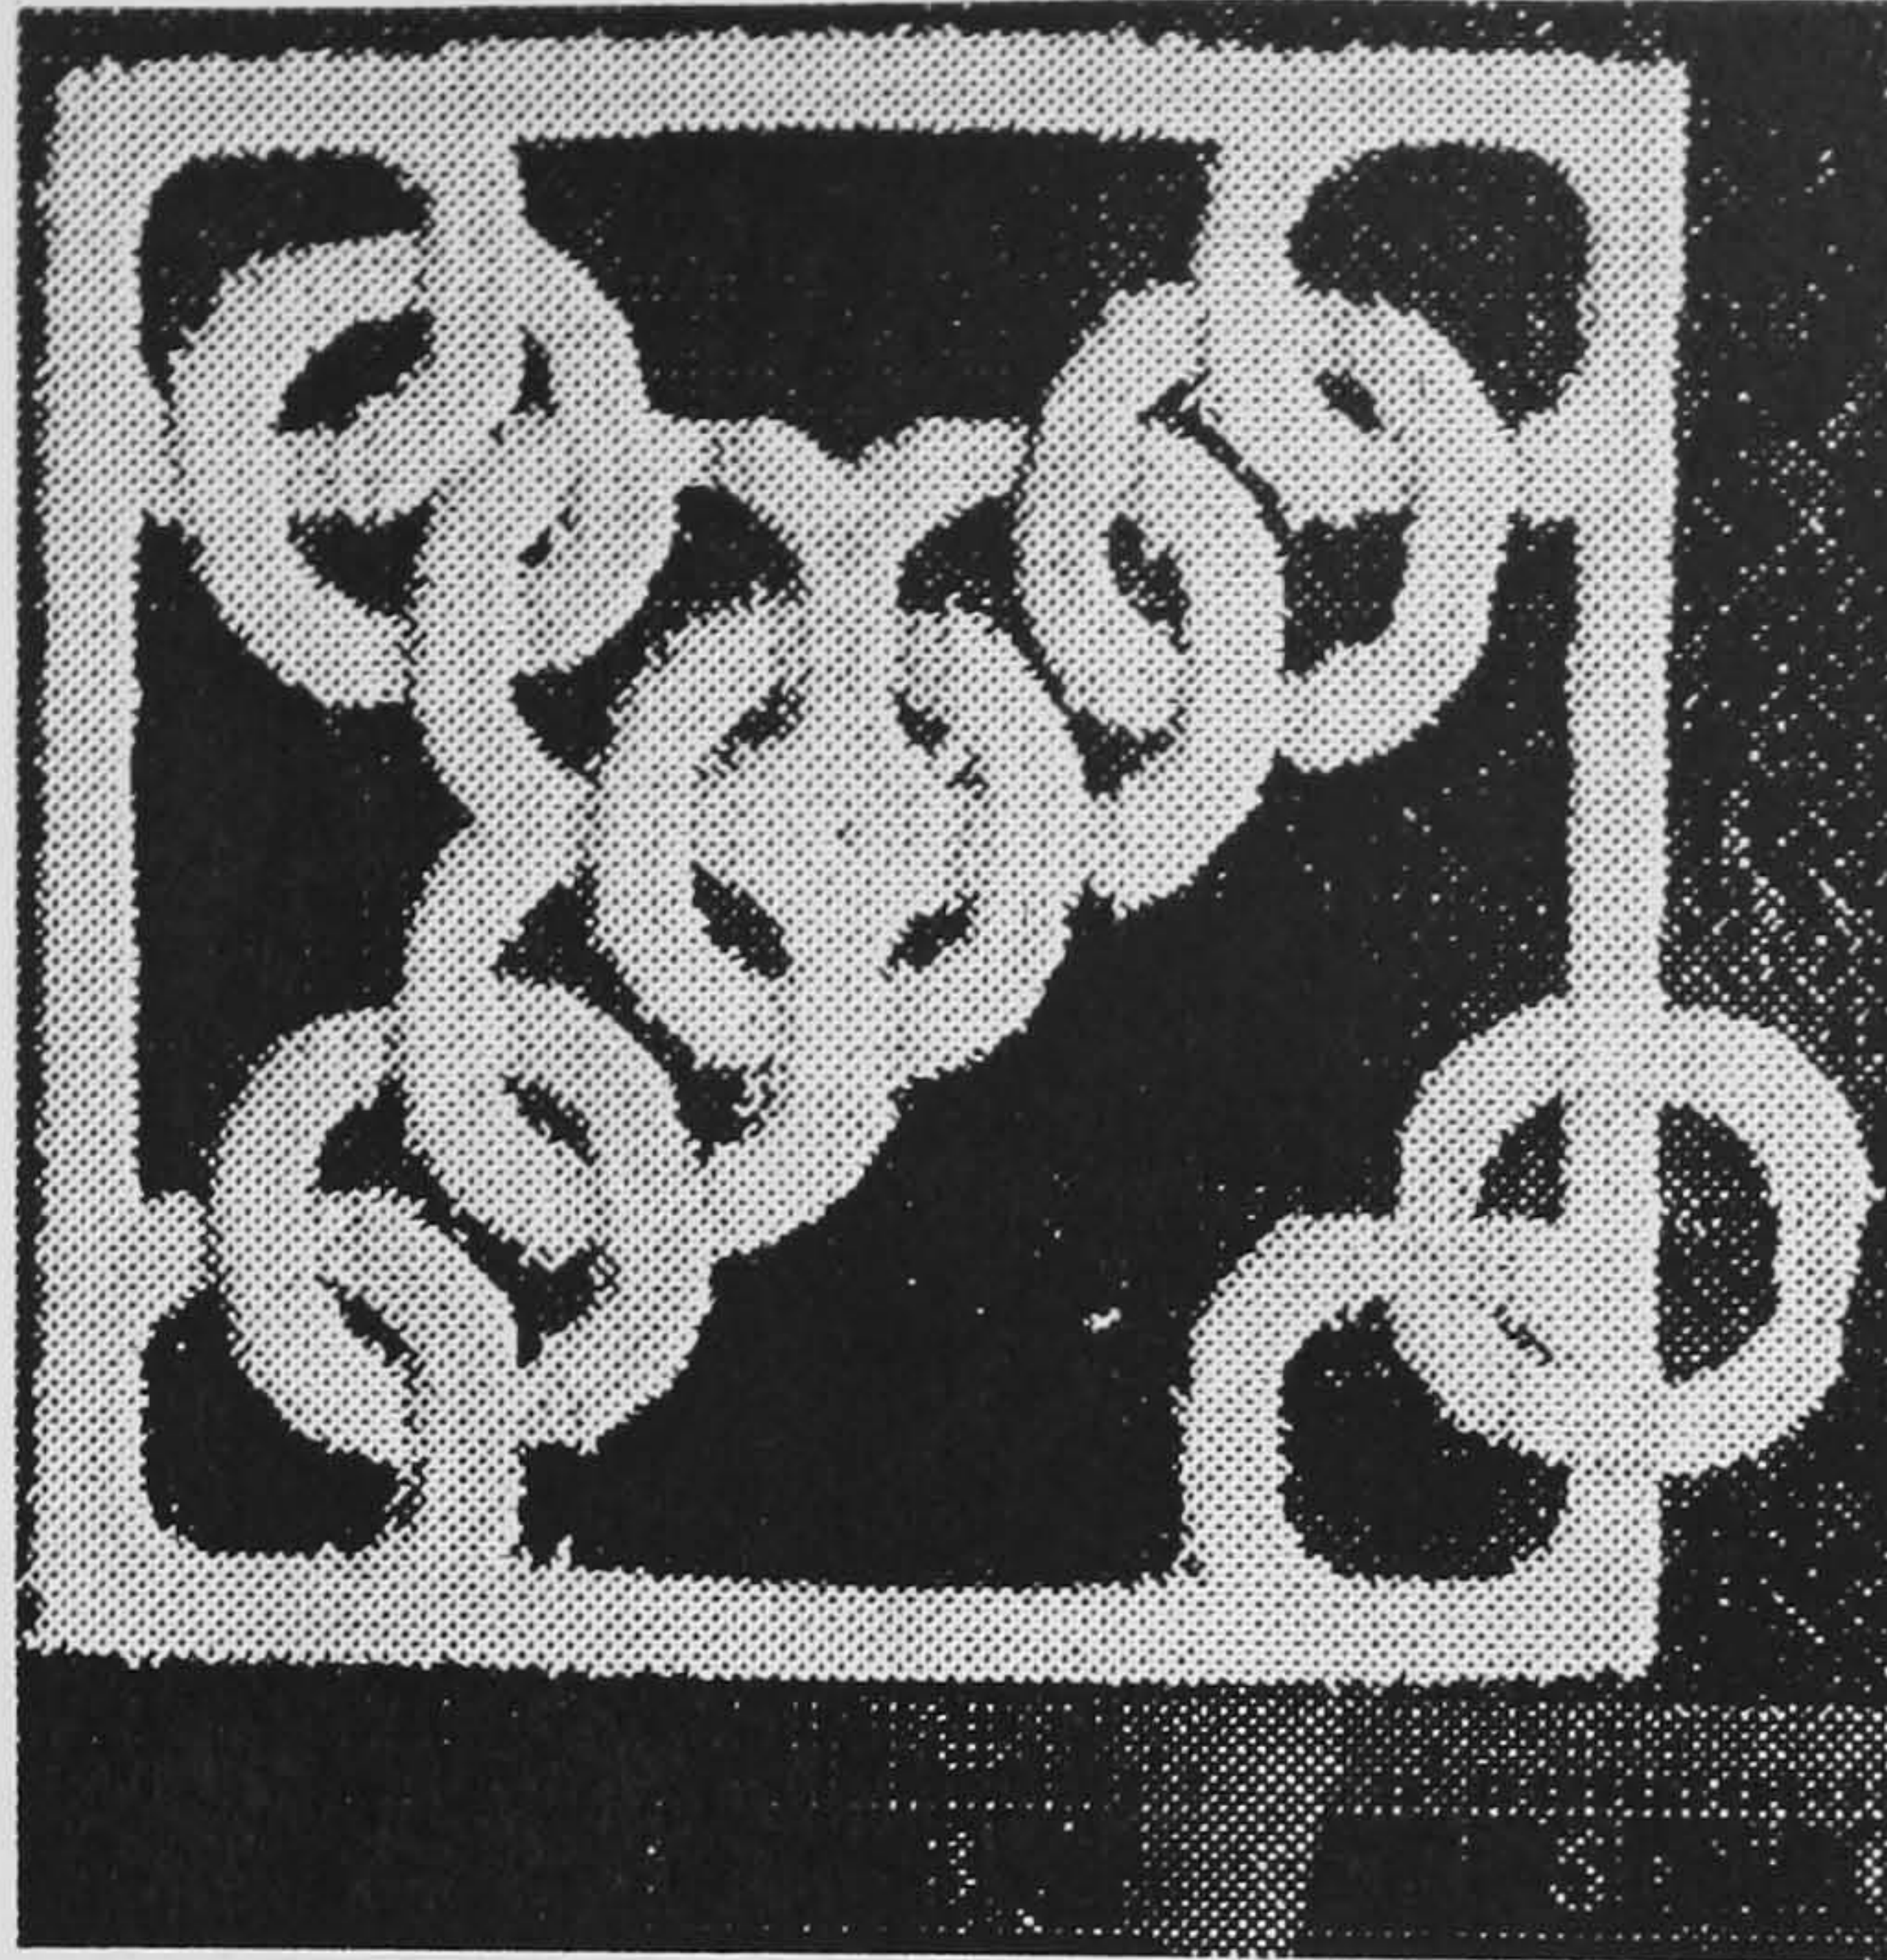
A 50mm² 750 micron high (or thick) part made of disconnected polyethylene components that were produced by over thermographing.
